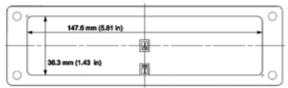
Pressure Panel Dimensions and Strain Gage Arrangement
